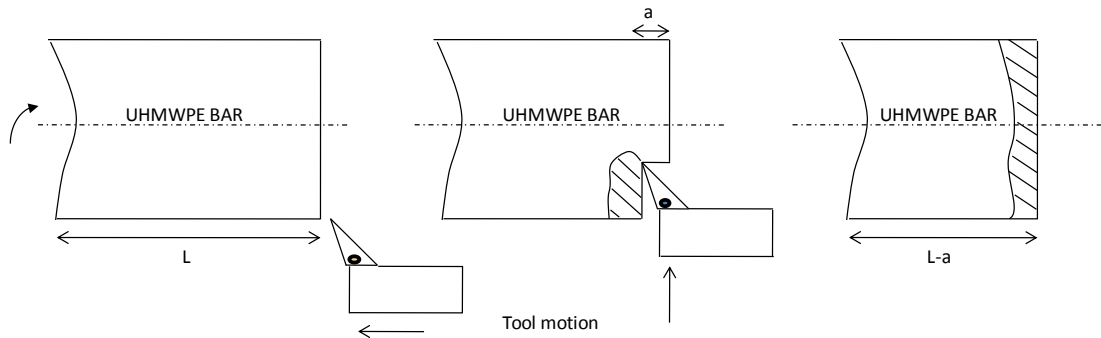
Machining process induced a near-surface damage zone due to the friction of the cutting tool across the face of the UHMWPE bar.
